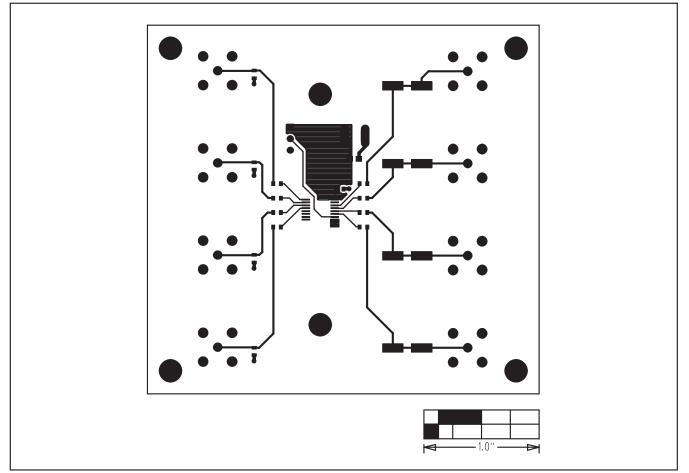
MAX9657 EV Kit Component PCB Layout—Component Side
